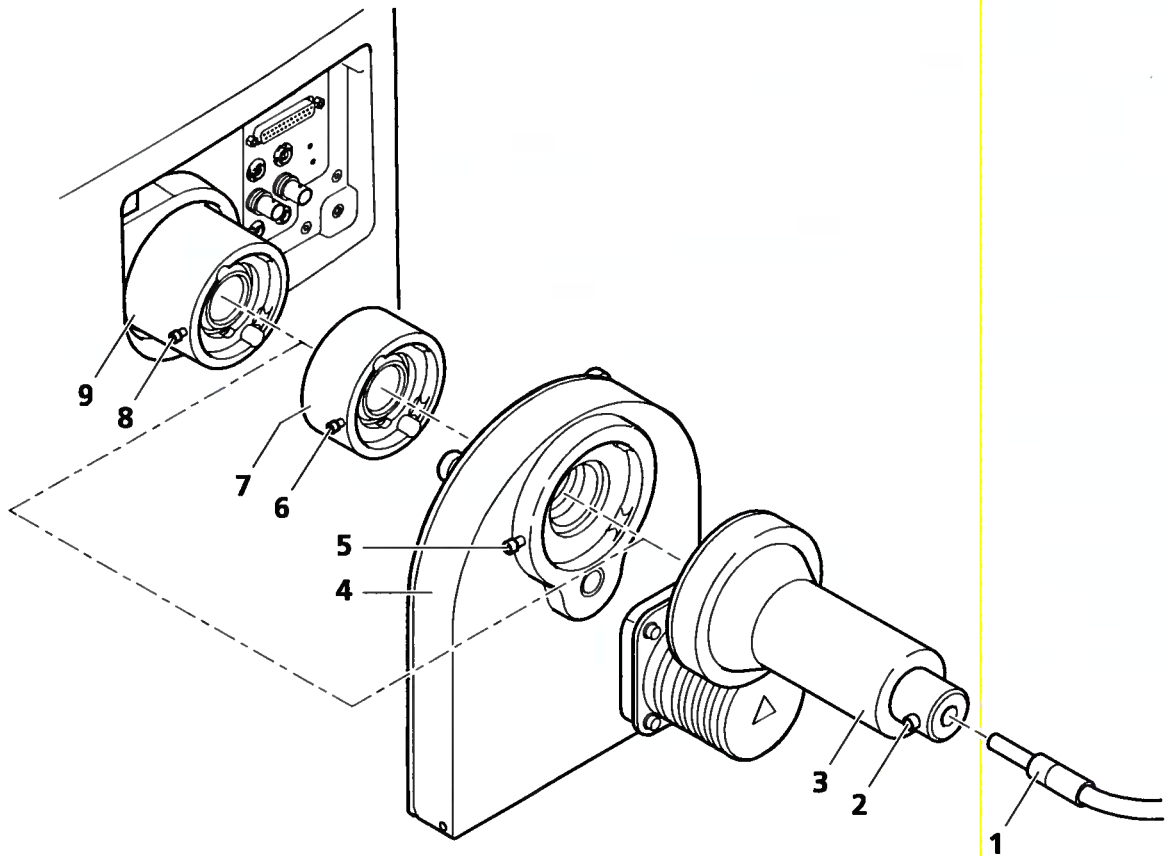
Mounting the external filter wheel and connecting the HXP 120 V with illumination adapter
